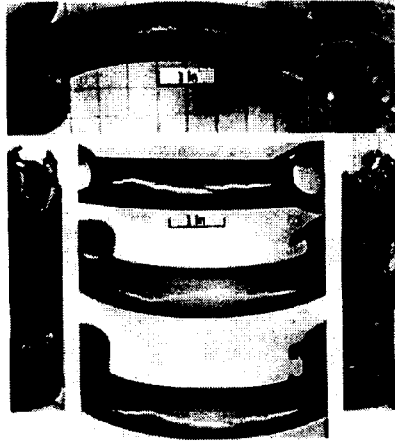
Surry 2, A(EI-C7), as-received. Intrados view (top), cold-ink view (middle left), hot-ink view (middle right), and three full-section radiographs (center).
